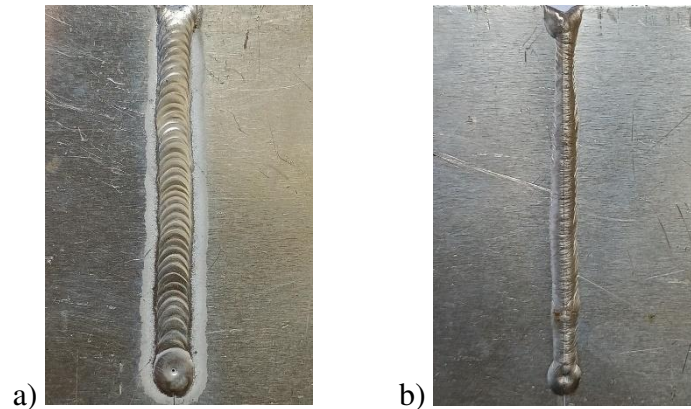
Butt joint of 2 mm thick sheets using the TIG method: a) weld face, b) weld root.
